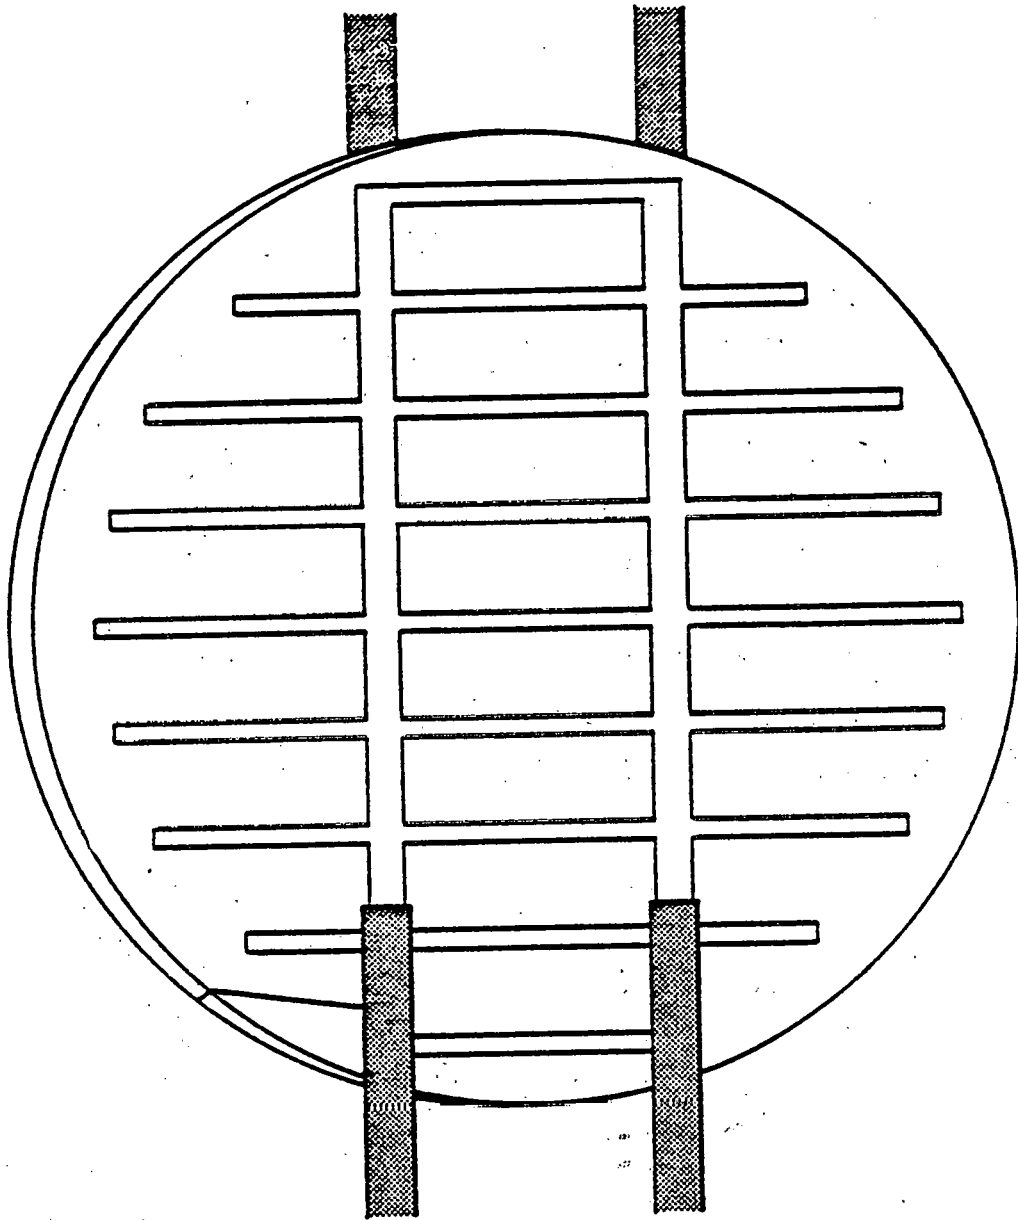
Edge Crack Terminated or Passing Through or Under Collector Solder Joint. Reject.
